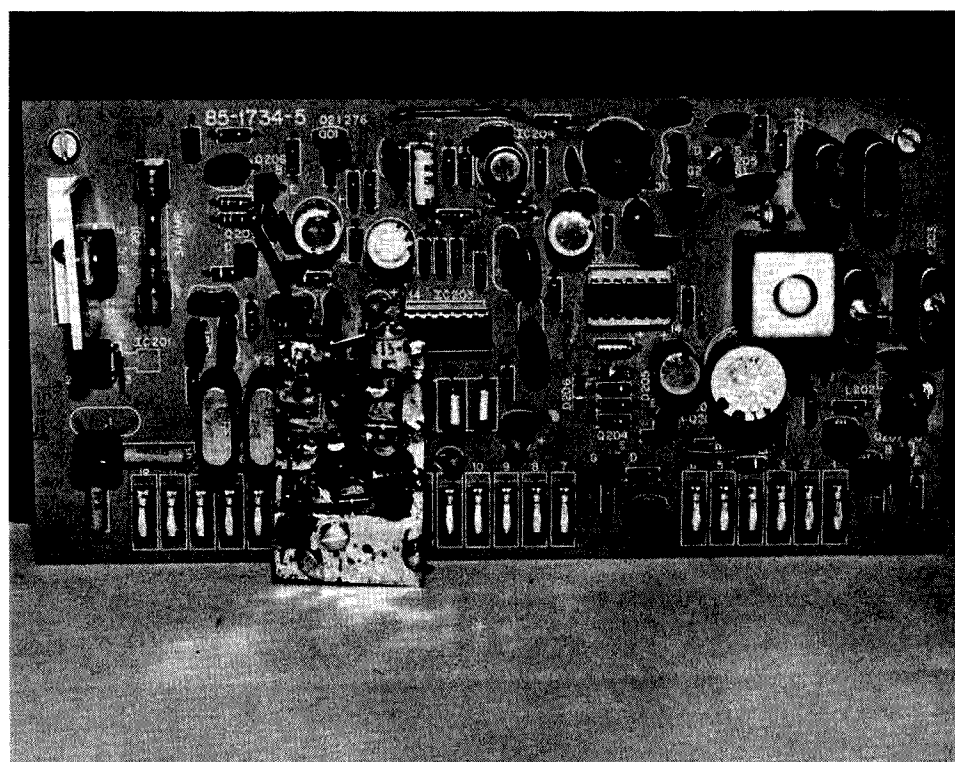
Photo C. Component-side view of AUD/REG board with new CW bfo board attached.
